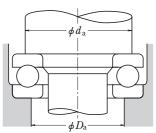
Face-Supporting Diameters for Thrust Ball Bearings
